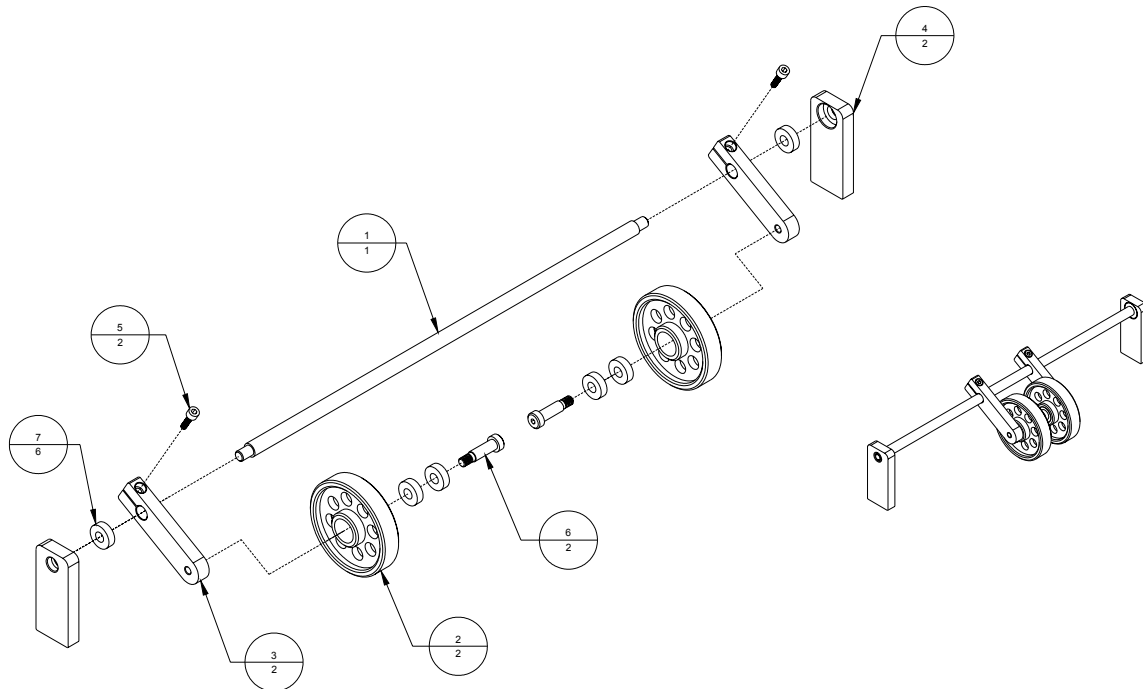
Outfeed Roller Shaft Assembly (100314A)
